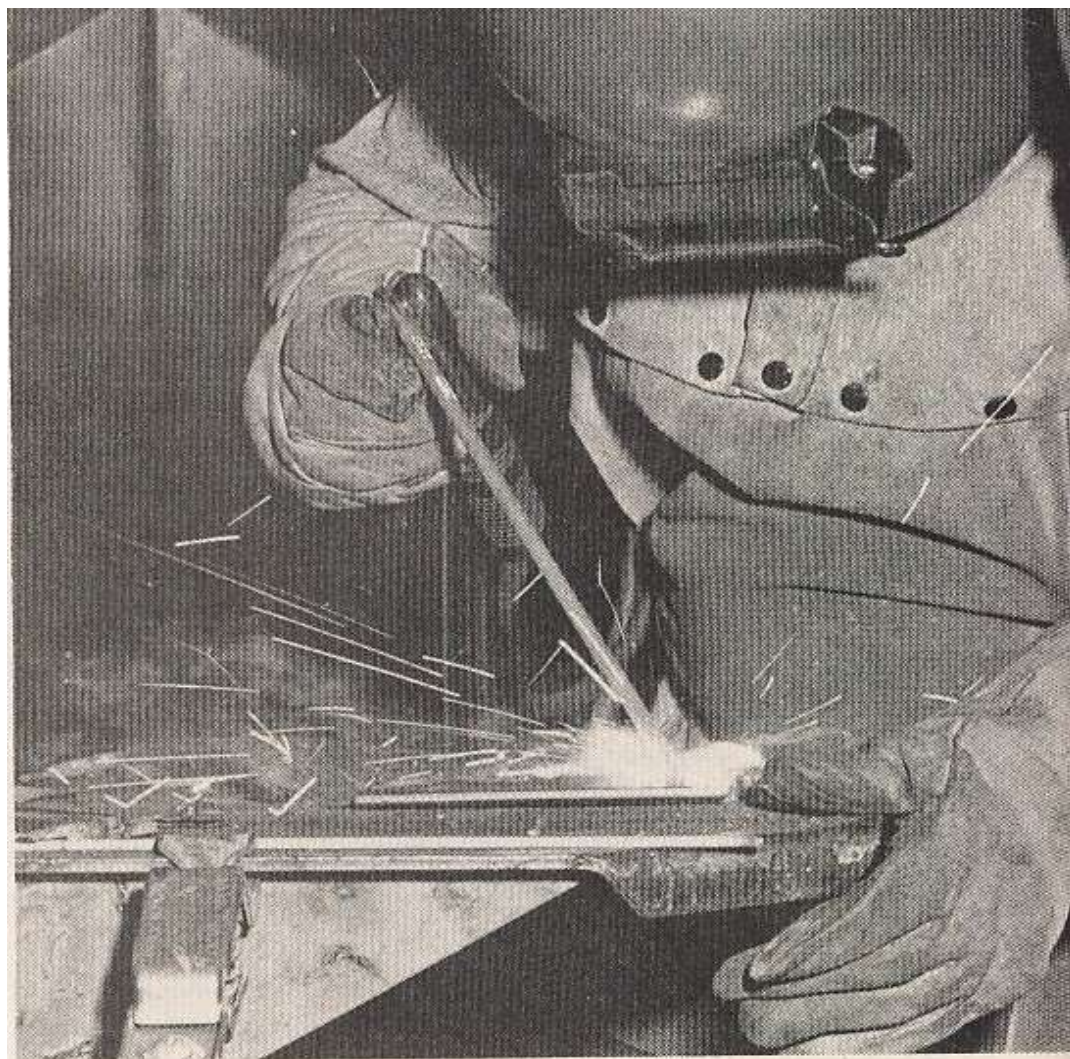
Shielded metal arc welding.
